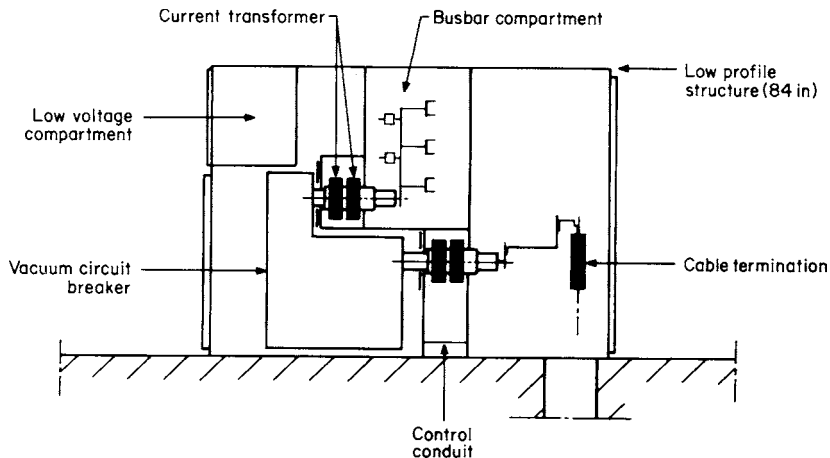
Side view of a 38-kV metal-clad switchgear unit with horizontal-drawout vacuum circuit breaker, type HKV, up to 3000 A, fan cooled, 22 kA.
